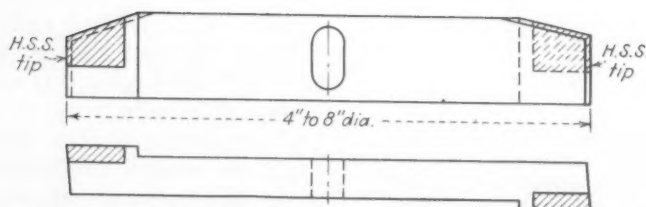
A considerable saving in tool cost has been obtained on this large fishtail cutter by tipping.
